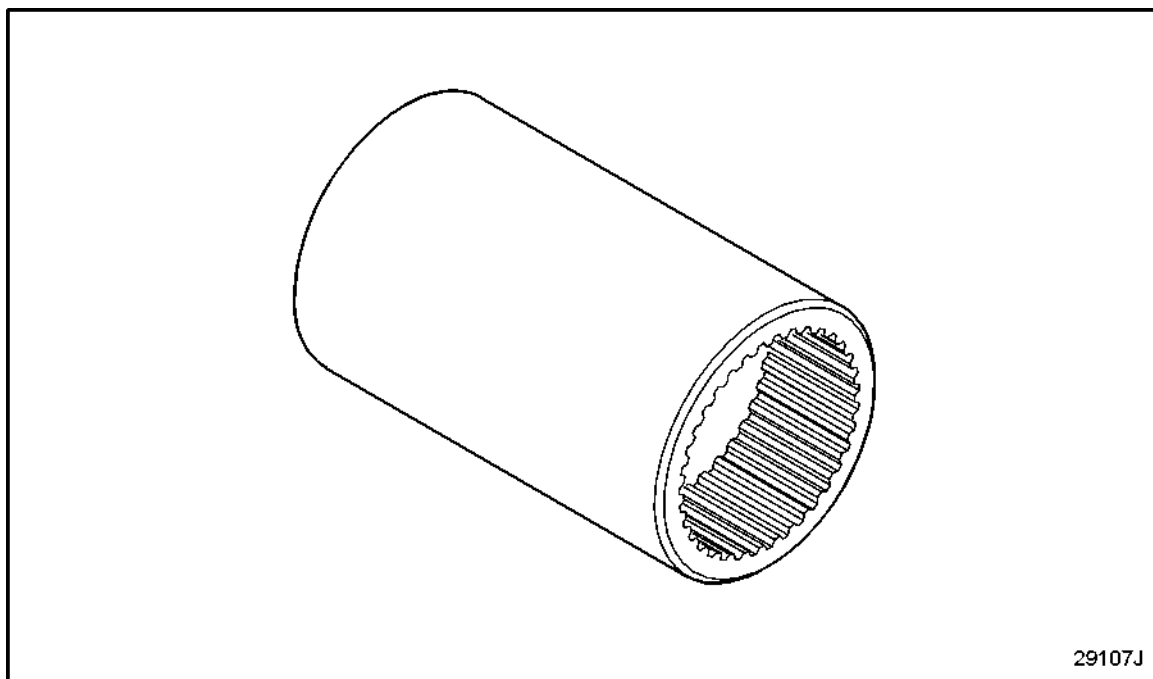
Drive Gear Sip TST (TRQ WR ADPT),J 23126
